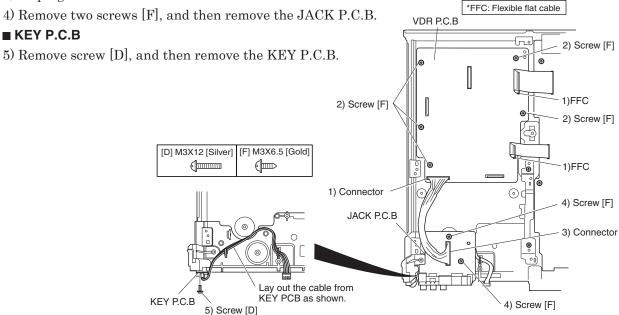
VDR P.C.B, JACK P.C.B, KEY P.C.B
